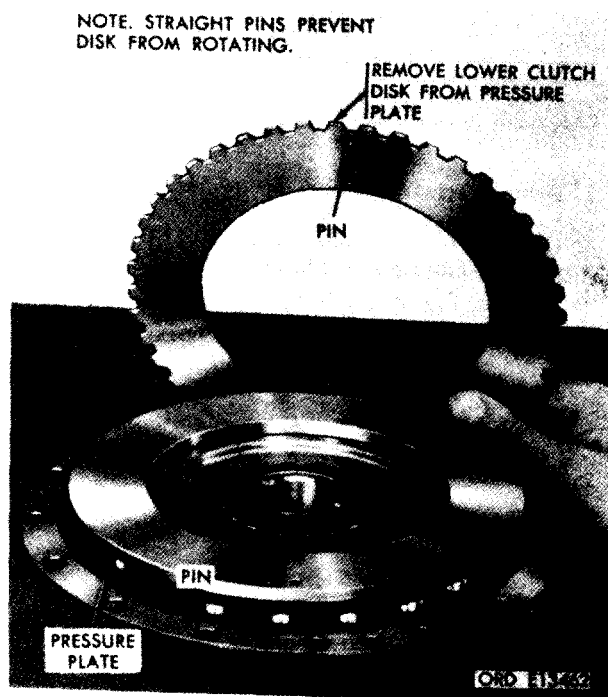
Removing or installing fan drive bottom clutch disc (piston actuated clutch),
